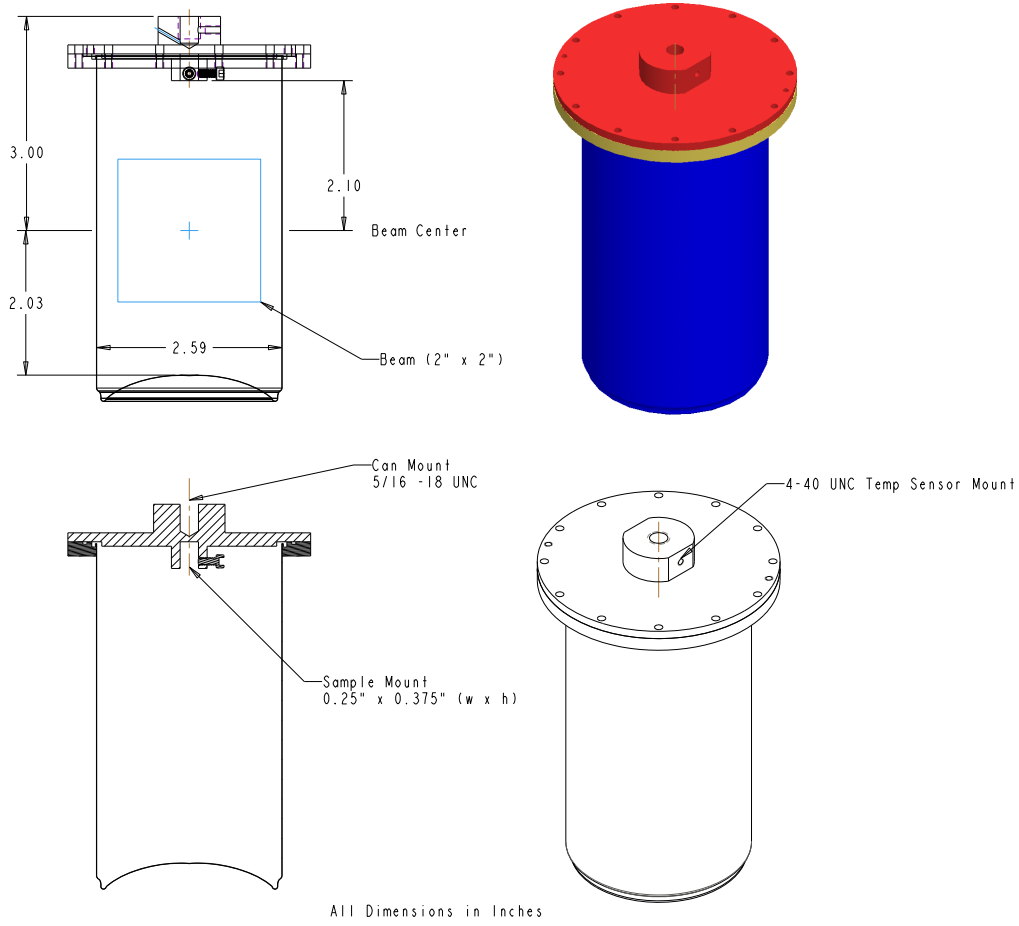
Dimensions of the standard large exchange gas can at ARCS. It is Indium sealed and filled with helium. The beam location on the can is shown in the blueprint.
